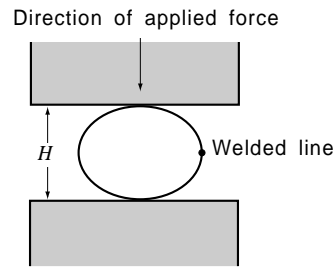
Flattening Test for Ordinary Test Specimen
